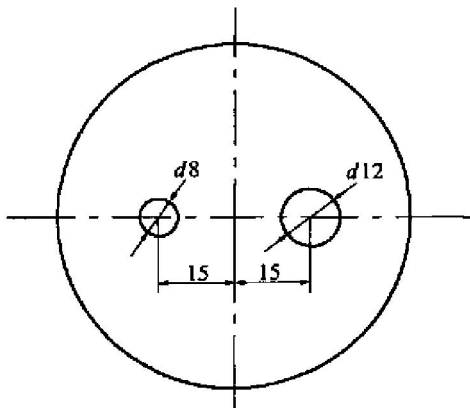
Die layout of extrusion test 1 (Unit: mm)
